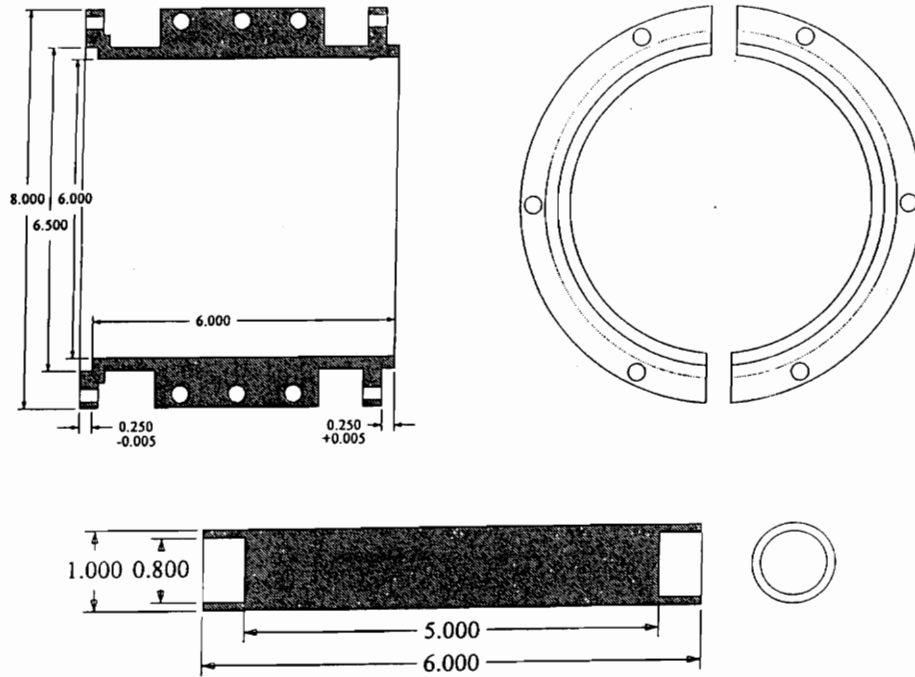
Sectional view of specimen holder and center conductor. (Dimensions in inch)
